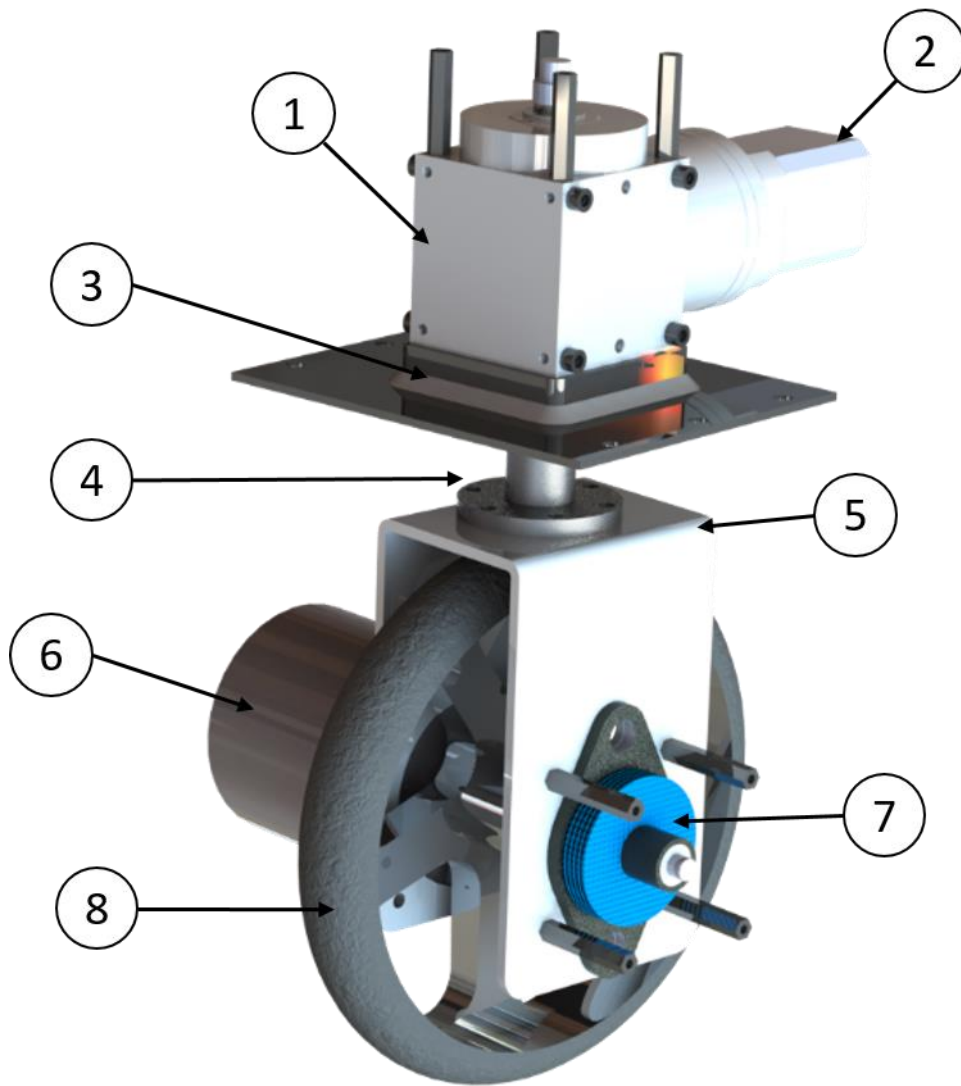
The Components of a wheel module. (1) Beveled Gearbox, (2) Yaw Motor, (3) Angular Contact Bearing Housing, (4) Outgoing Shaft, (5) Wheel Fork, (6) Roll Motor, (7) bearing Housing, (8) Wheel
